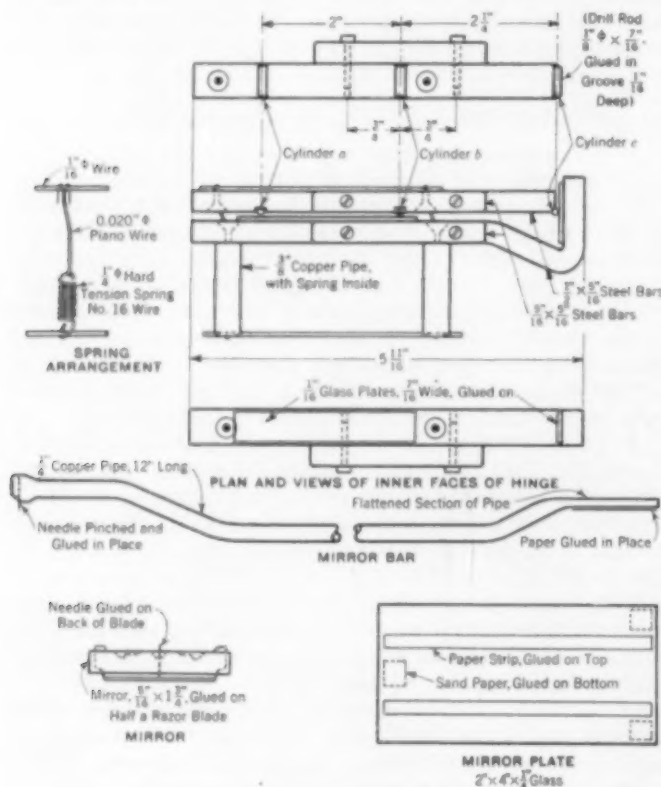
DETAILS AND PRINCIPAL DIMENSIONS OF A SIMPLE DEFORMER
